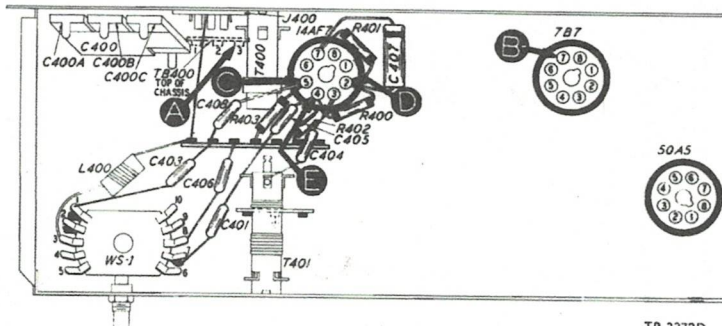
BOTTOM VIEW, SHOWING SECTION 4 TEST POINTS. TP-3372D
